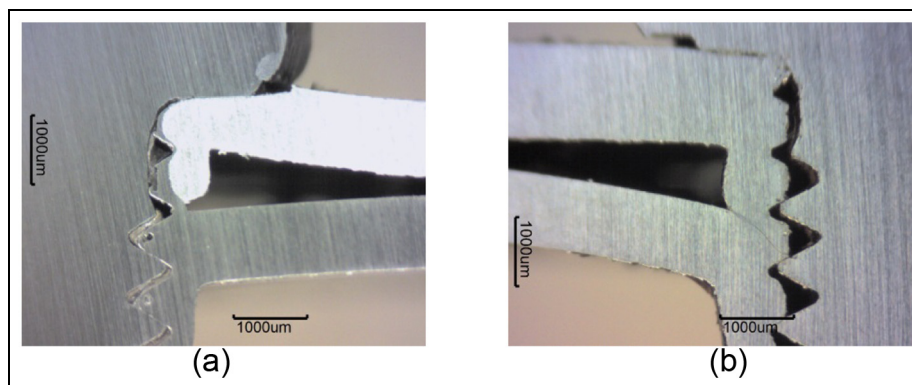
(a) Welded union between plate and tube necessary for a suitable thread (case B) and (b) union without connection between plate and tube (AISI 1045 and 1020).
